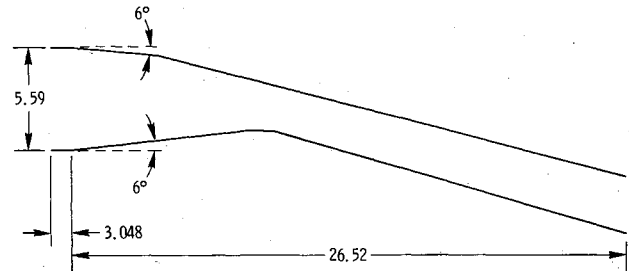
Sketch of side-mounted integral rocket-ramjet inlet (dimensions in cm).
